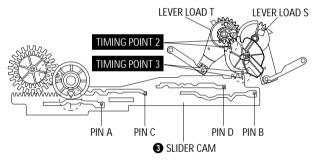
Gear Loading Drive, Slider Cam, Lever Load S, T Ass'y Assembly
